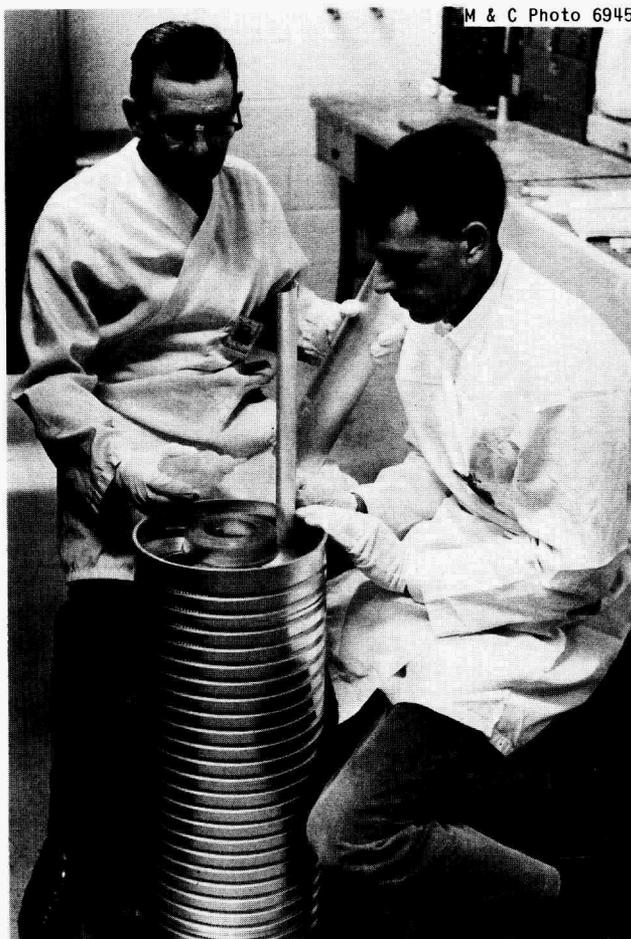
Inspector and Assembler Assembling Fuel Plates in Fuel Element.
